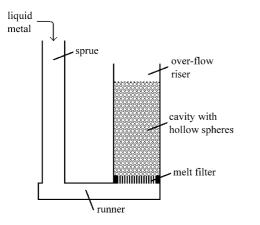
Gravity casting mold design for producing composite metal foam samples.
